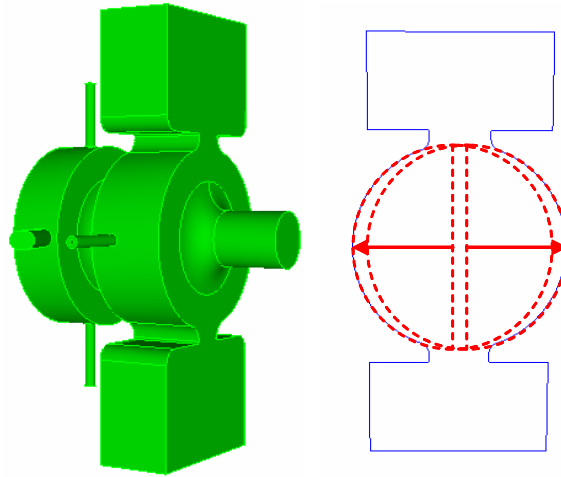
Interior geometry of the LCLS gun. Left: The solid model of the interior surfaces. Right: Drawing of the full cell showing the construction of the racetrack shape with two offset circles.
